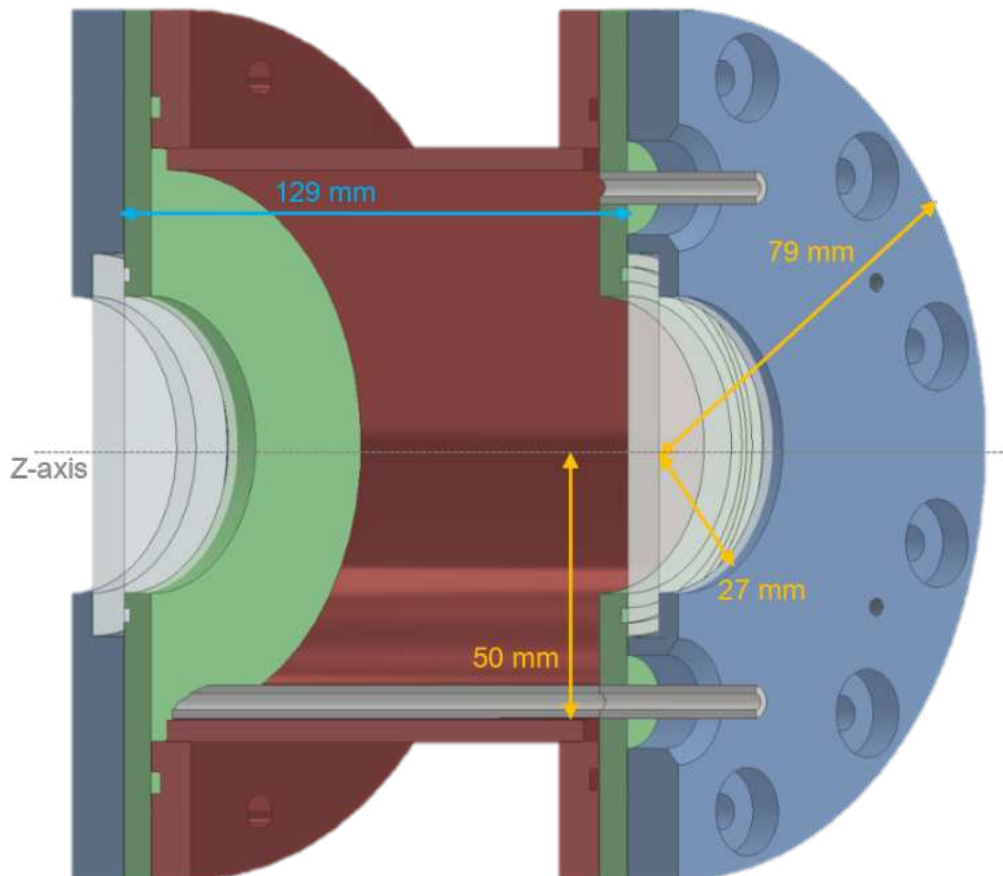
Half view of the digital sketch and dimensions of the test cell with each component having a different colour. In red is shown the middle part of the cell with a flange welded on at each side. The green and blue flanges hold the UV-transparent acrylic glass in place.
